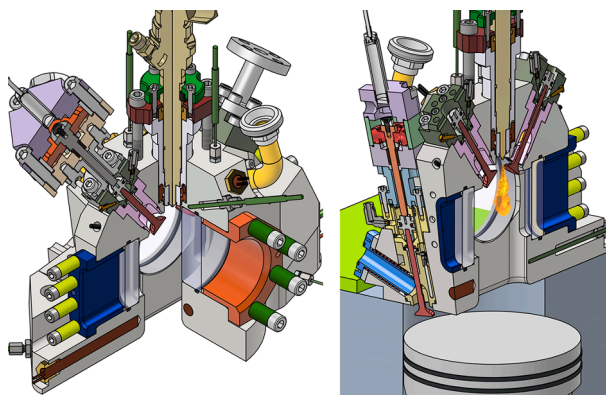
Cylinder head on the working cylinder with optical combustion chamber, intake/exhaust valves, and centered pilot fuel injector.
